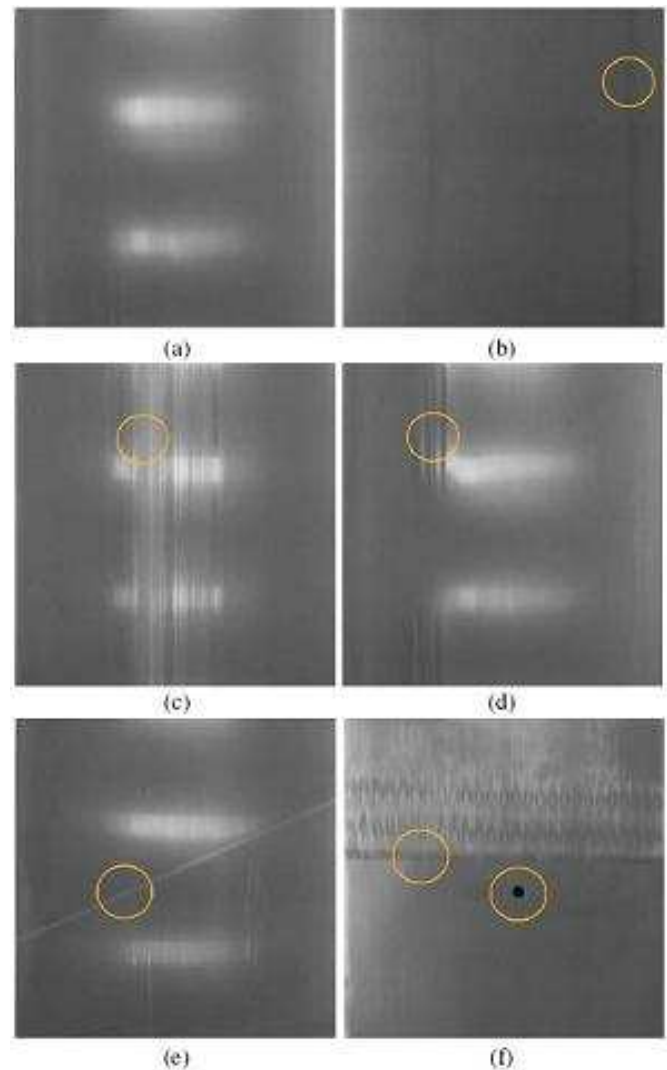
Image samples containing the six surface defects considered. (a) Sample without defects, (b) Oxidation, (c) Exfoliation, (d) Waveform defect, (e) Welding and (f) Clamp and identification hole.
